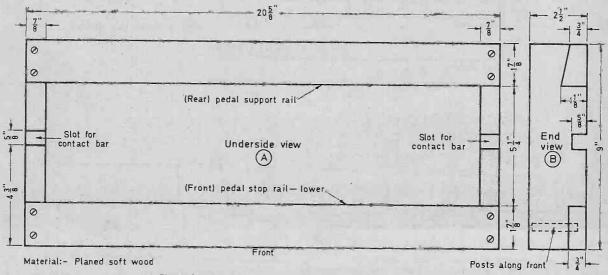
Constructional details of the wooden pedal frame of the unit.
